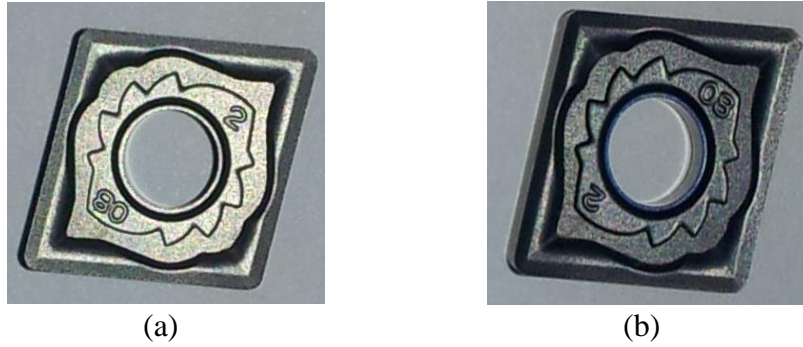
Rhombus shaped of cutting tool (a) uncoated and (b) coated
